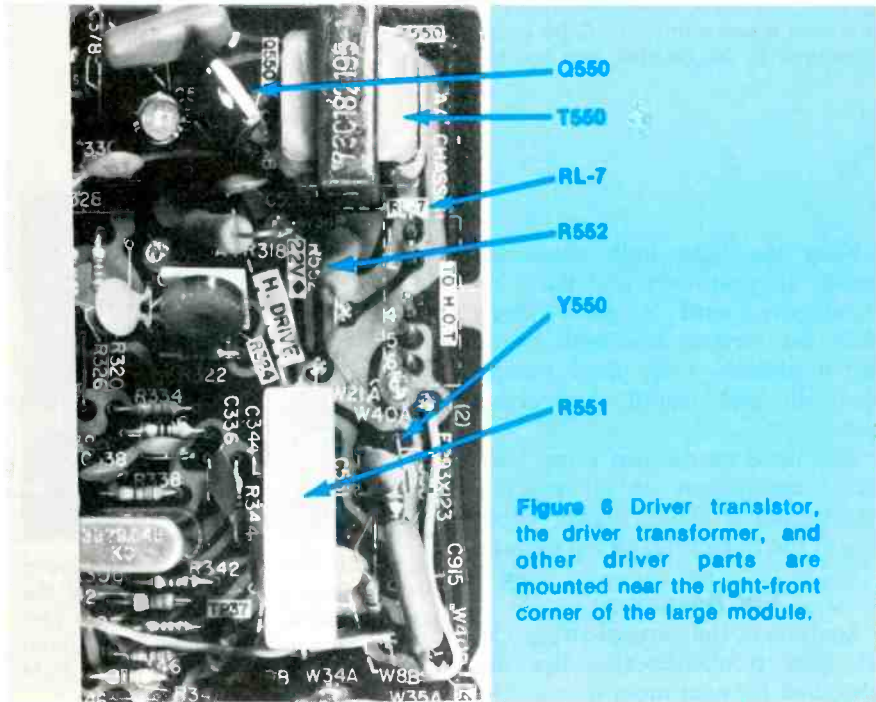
Driver transistor, the driver transformer, and other driver parts are mounted near the right-front corner of the large module.
